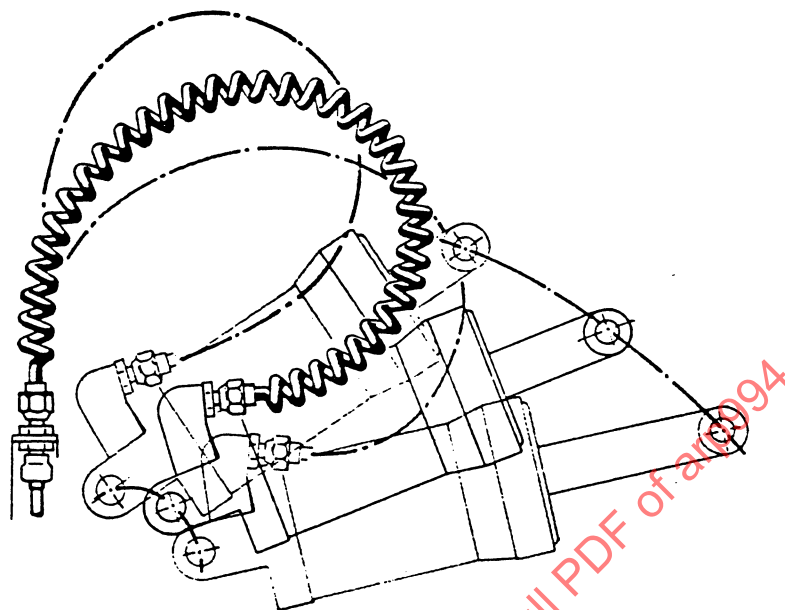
SPIRAL TUBE PRESHAPED TO PROVIDE NONSTRESSED CONDITION IN NOMINAL POSITION
